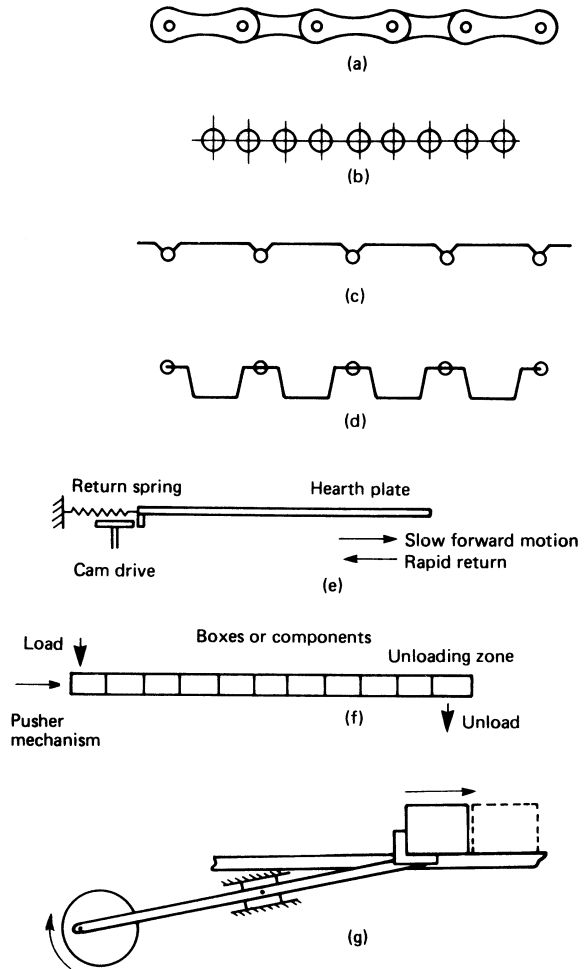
Some examples of conveyor furnace mechanisms. (a) Cast link conveyor; (b) Roller hearth; (c) Salt belt conveyor; (d) Slat pan conveyor; (e) Shaker hearth; (f) Pusher furnace mechanism; (g) Walking beam furnace
